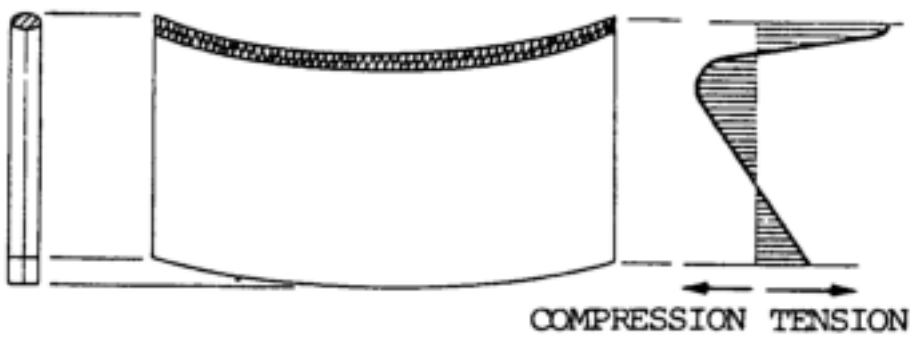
Edge welded joint -- residual stress pattern.
